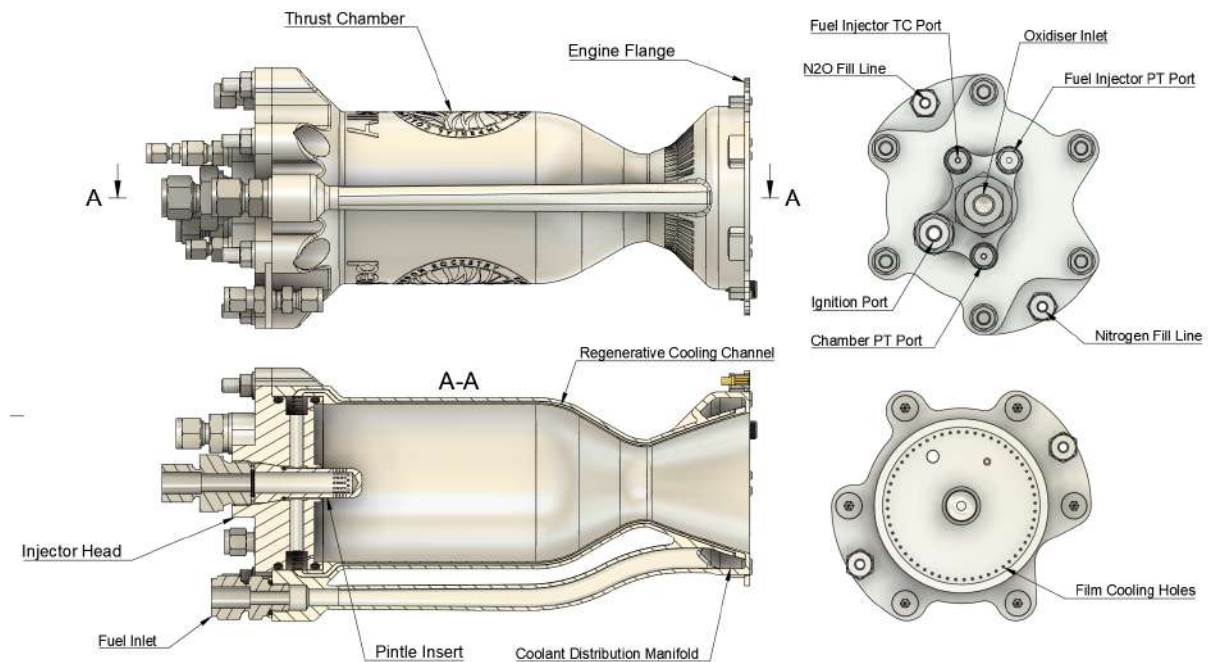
Cross Section of Chamber Assembly (left) & Top and Bottom Views of Injector Assembly (Right)
